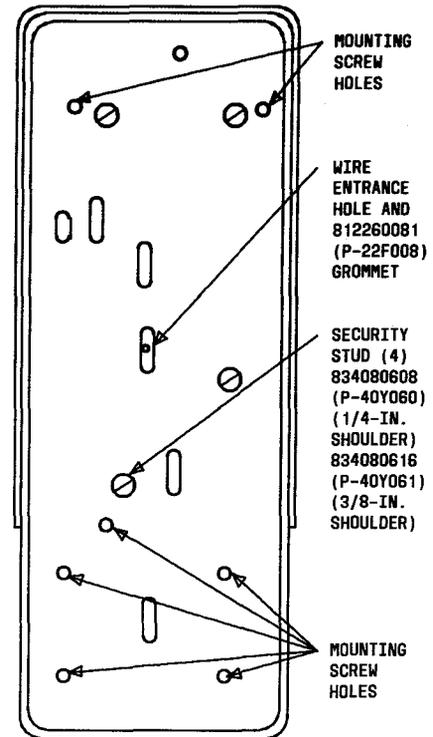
Location of Mounting Screw Holes and Security Studs in 1D-Type Set
